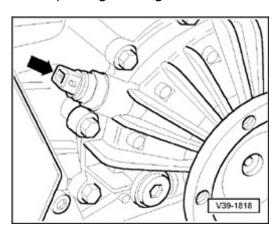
Removing and installing transmission Vehicle Speed Sensor (VSS) -G38-
